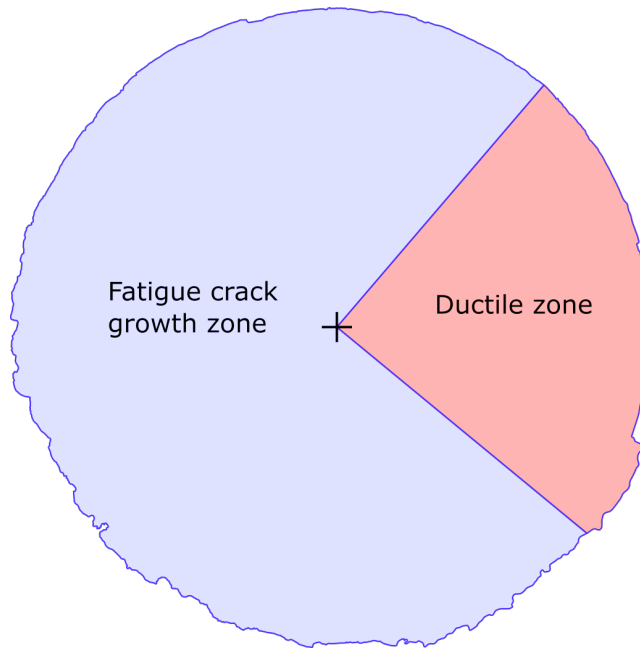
Measurements of fracture surface with respect to fatigue crack growth zone.
